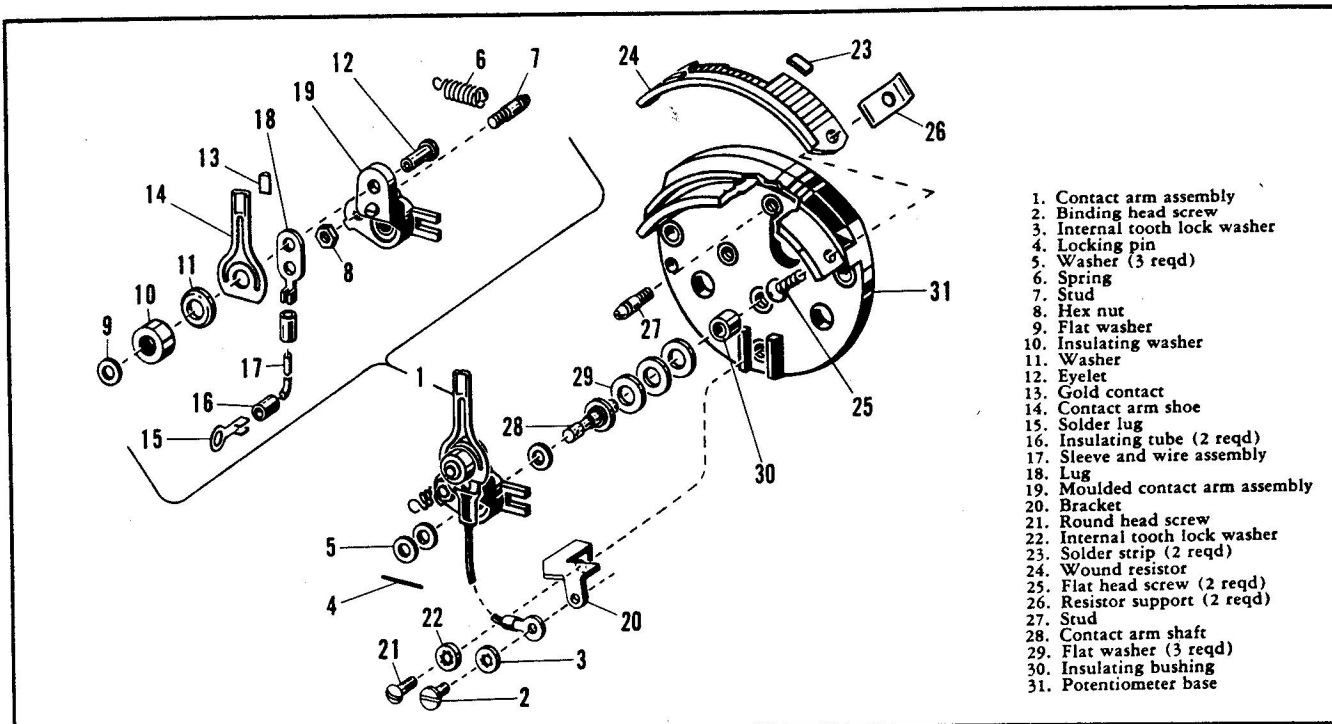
A. Exploded View of Typical Flexible Contact Arm Lead Type Potentiometer Having a Single Resistance Strip
